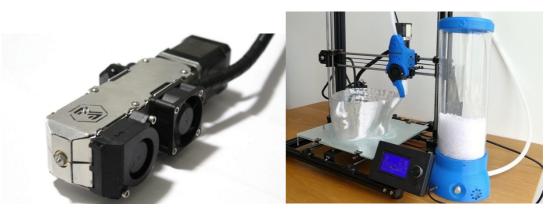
and 4: Mahor XYZ pellet extruder (3) [9] and Pellet printer (4) [10]
